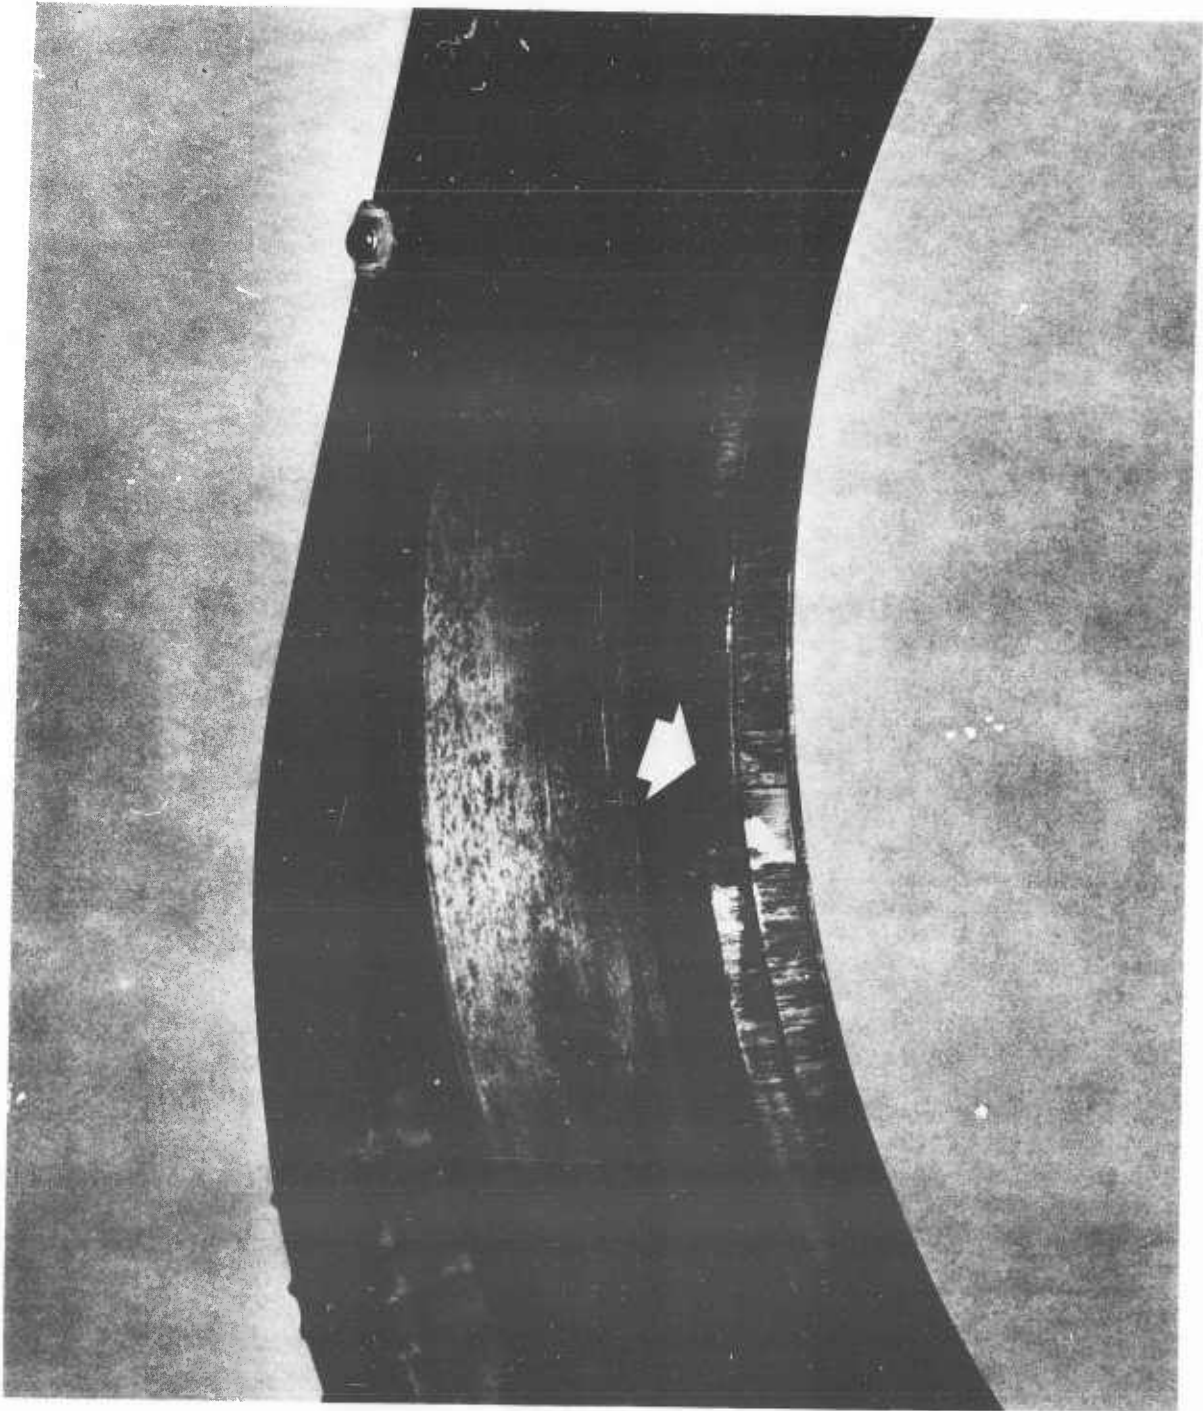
6-10 Close-Up of Articulate Duct Inboard Seal Segmented Carbon Rings.
